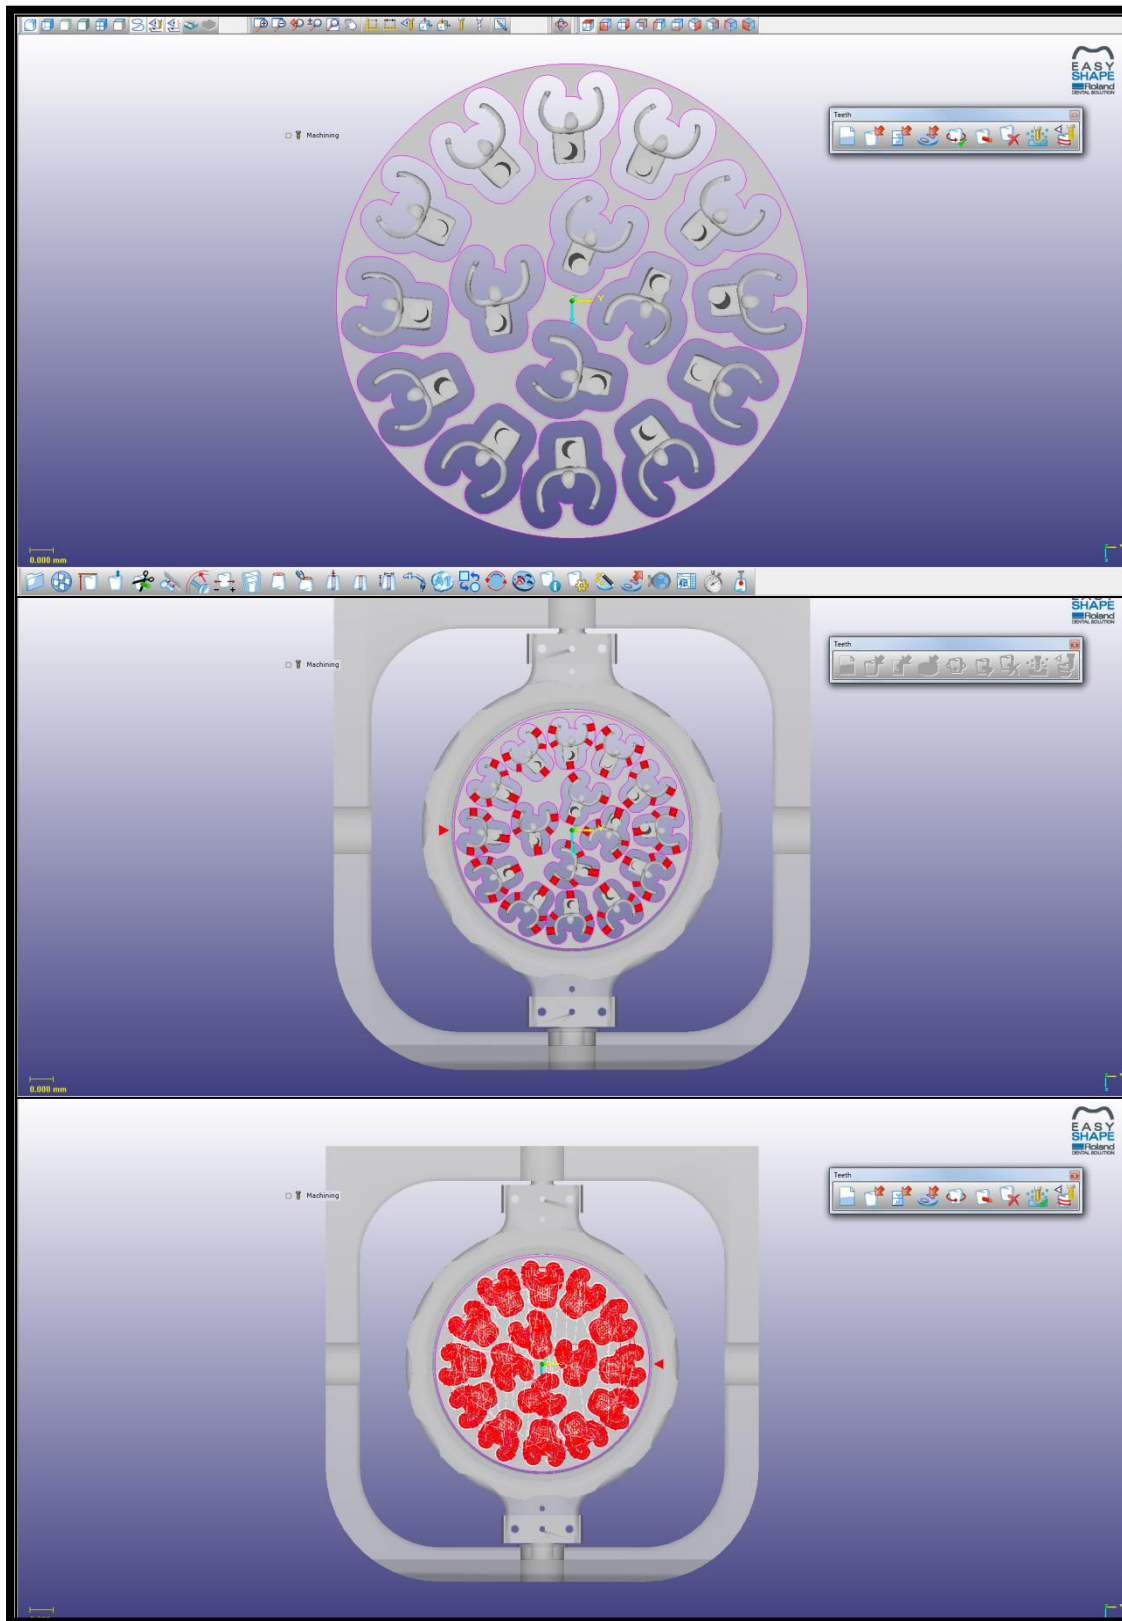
Co-Cr clasps sample arranged for milling into wax for Co-Cr specimen using Roland CAM machine
